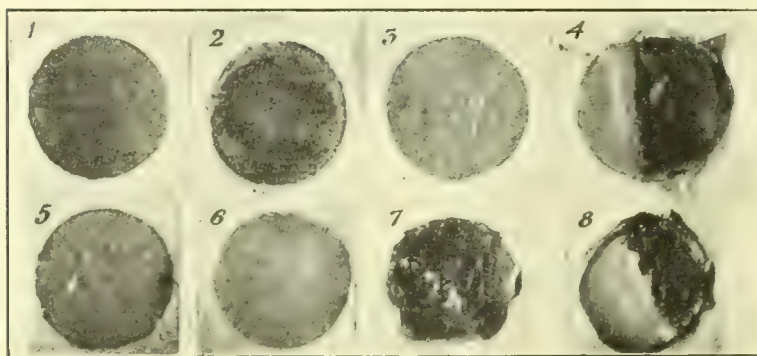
BROMIDE PRINTS FROM CUT SECTIONS AND FRACTURES
